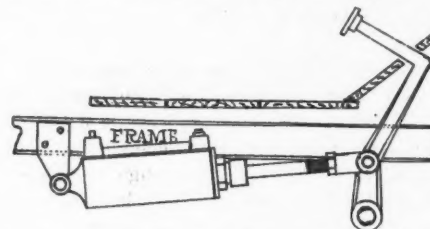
Showing method of attaching the Schooler hydraulic clutch check, which prevents harsh gear changes and clutch grabbing
